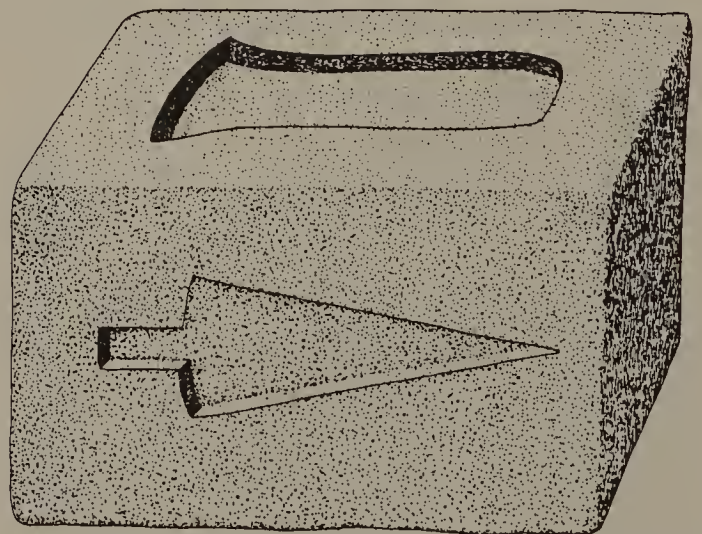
Drawing of a simple open mold made of sandstone used for casting metal objects such as daggers and chisels. Molten copper was poured into the mold. The cooled, hardened metal was then finished and sharpened. The mold was recovered at Chagar Bazar and dates to circa 2400 to 1900 BCE. H. HODGES, *TECHNOLOGY IN THE ANCIENT WORLD* (1970)
